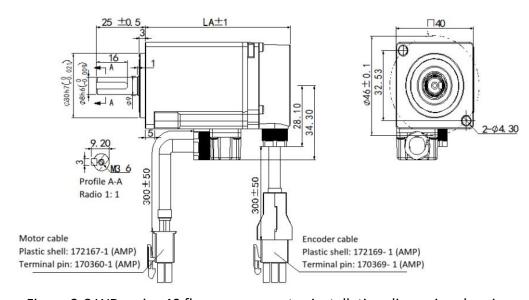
WD series 40 flange servo motor installation dimension drawing
